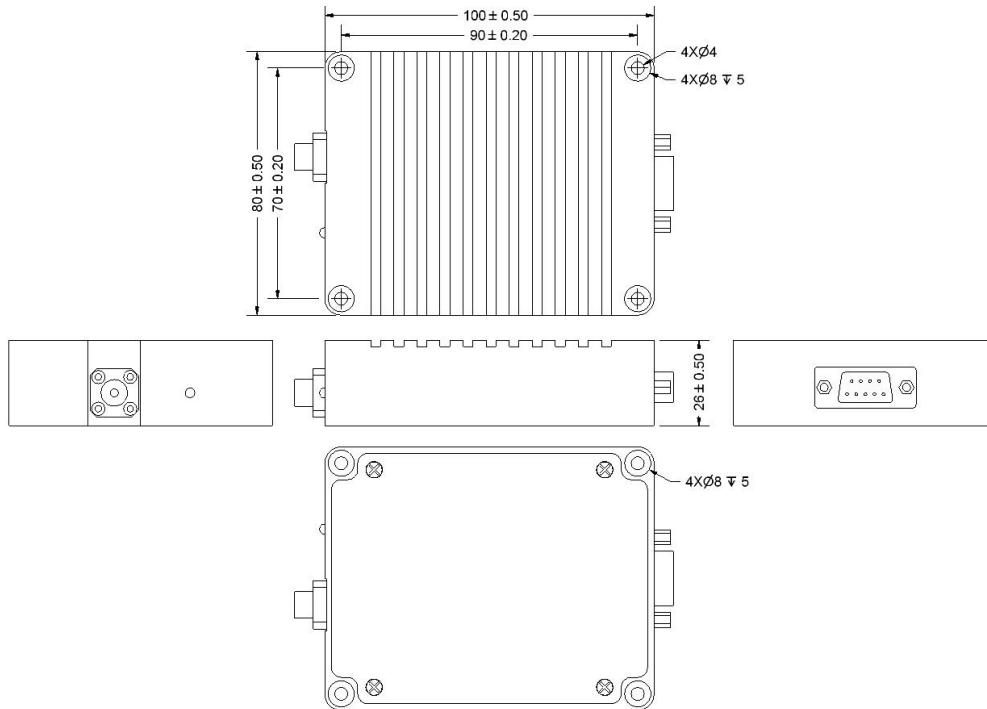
Mechanical drawing of module box (FC/APC connector with FC adaptor)
